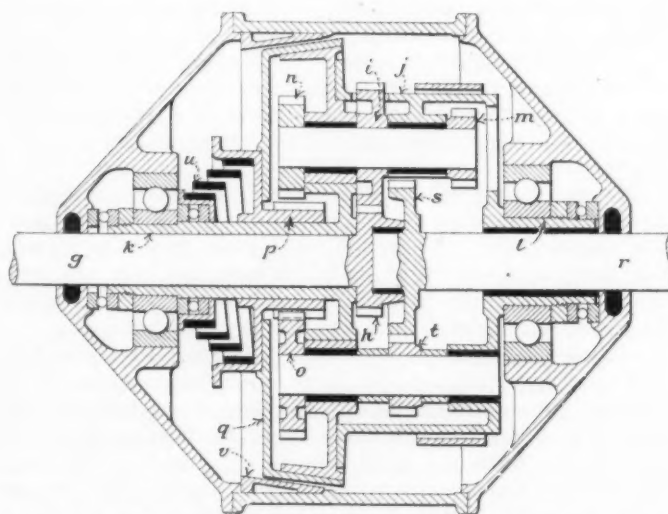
EPICYCLIC GEARBOX PROVIDING FOUR FORWARD SPEEDS AND A REVERSE SPEED
